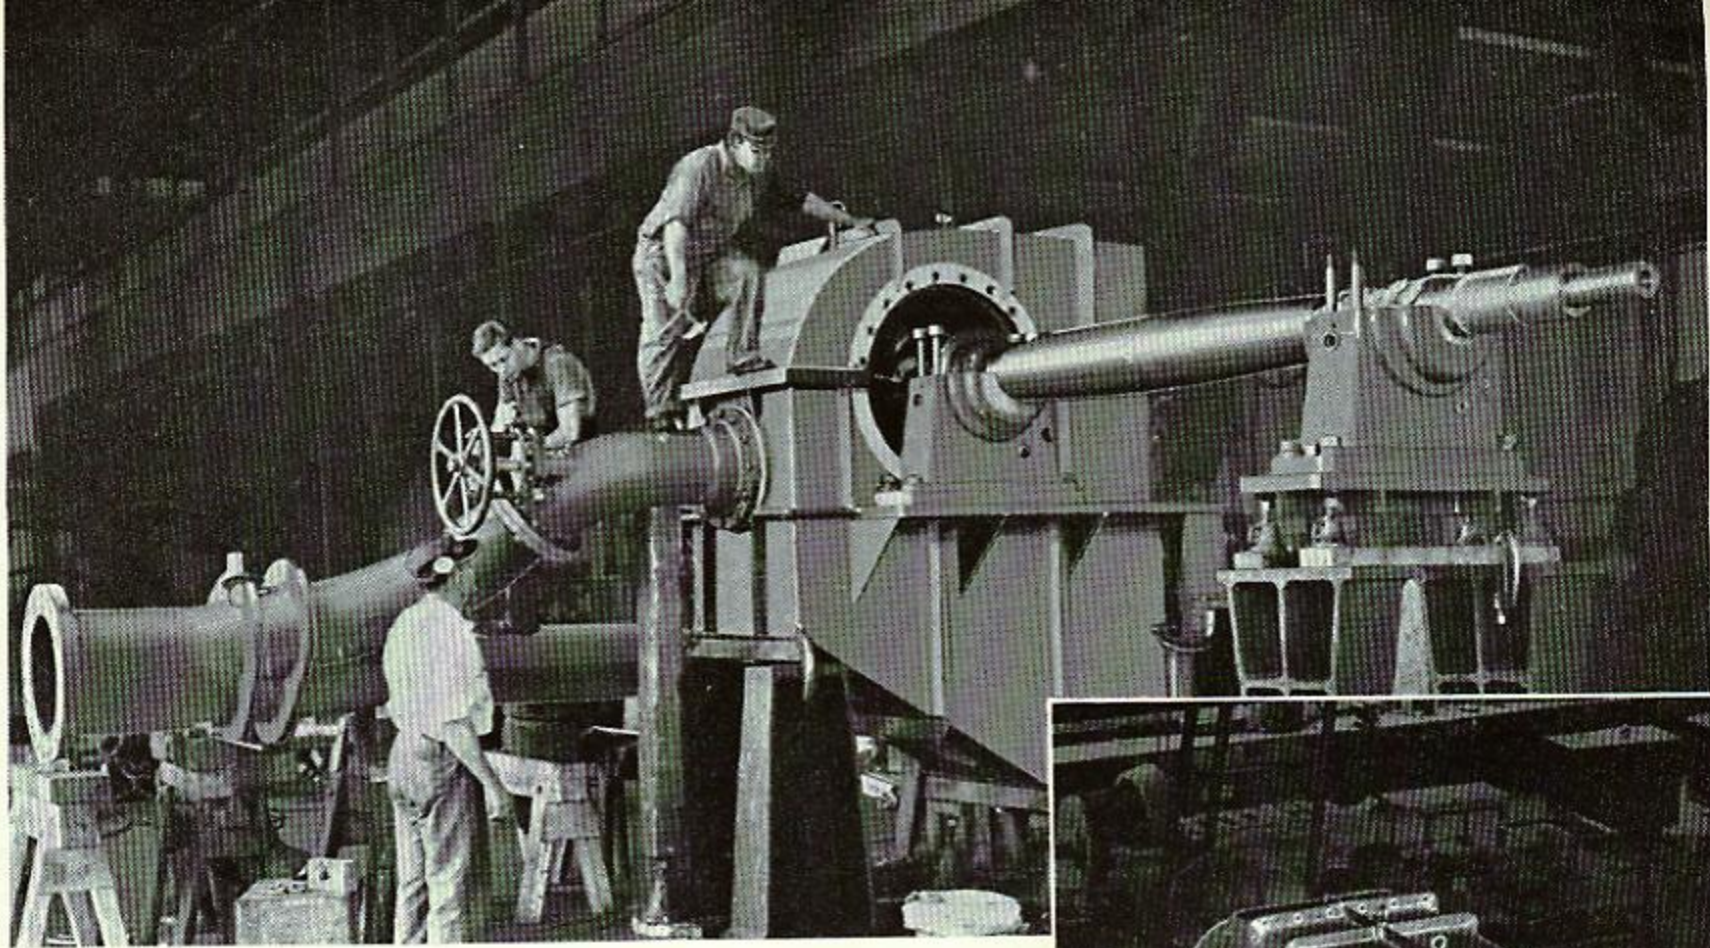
Workmen completing one of two units for installation in Colombia, S. A., showing generator shaft, bearings and welded steel discharge liner.
